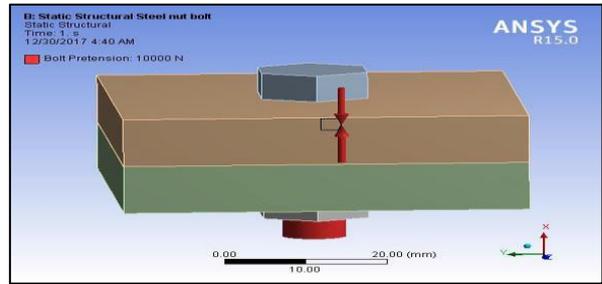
Bolted lap joint assembly with applied forces and boundary conditions
